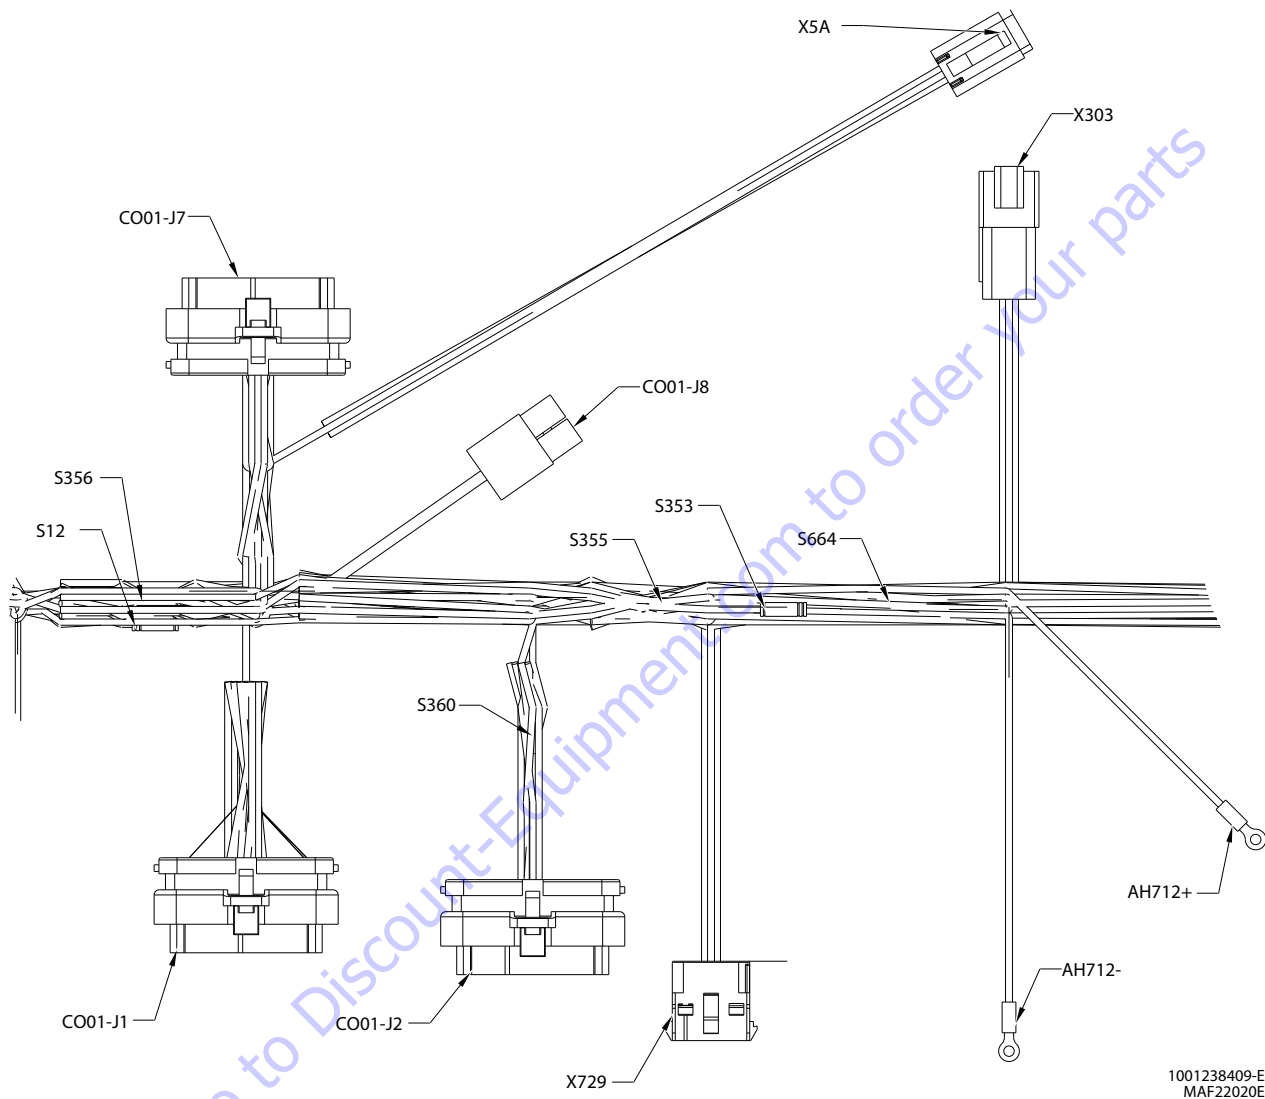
Platform Box Harness - Sheet 3 of 6
